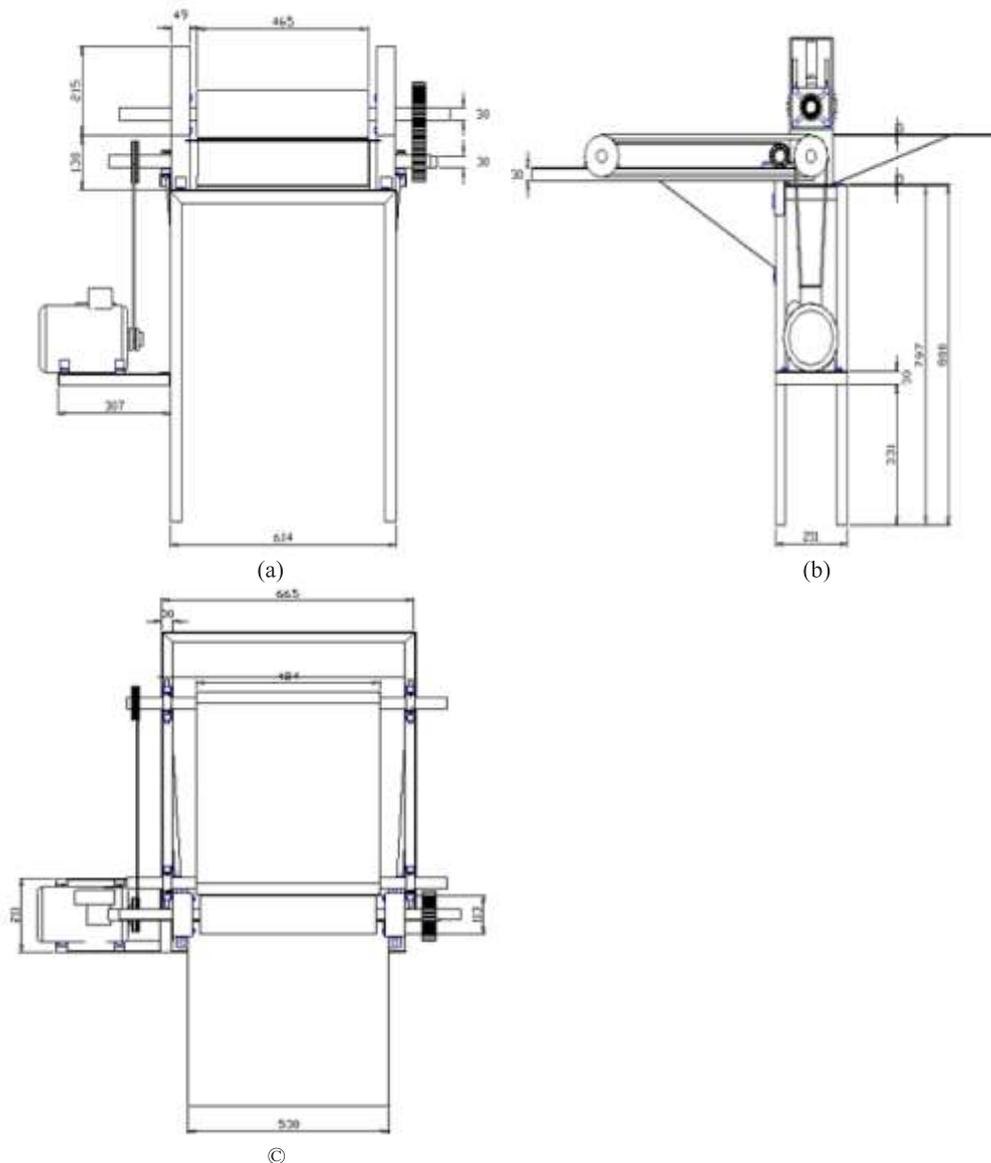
Orthographic views of the machine (a-front view, b-side view, c- plan)
